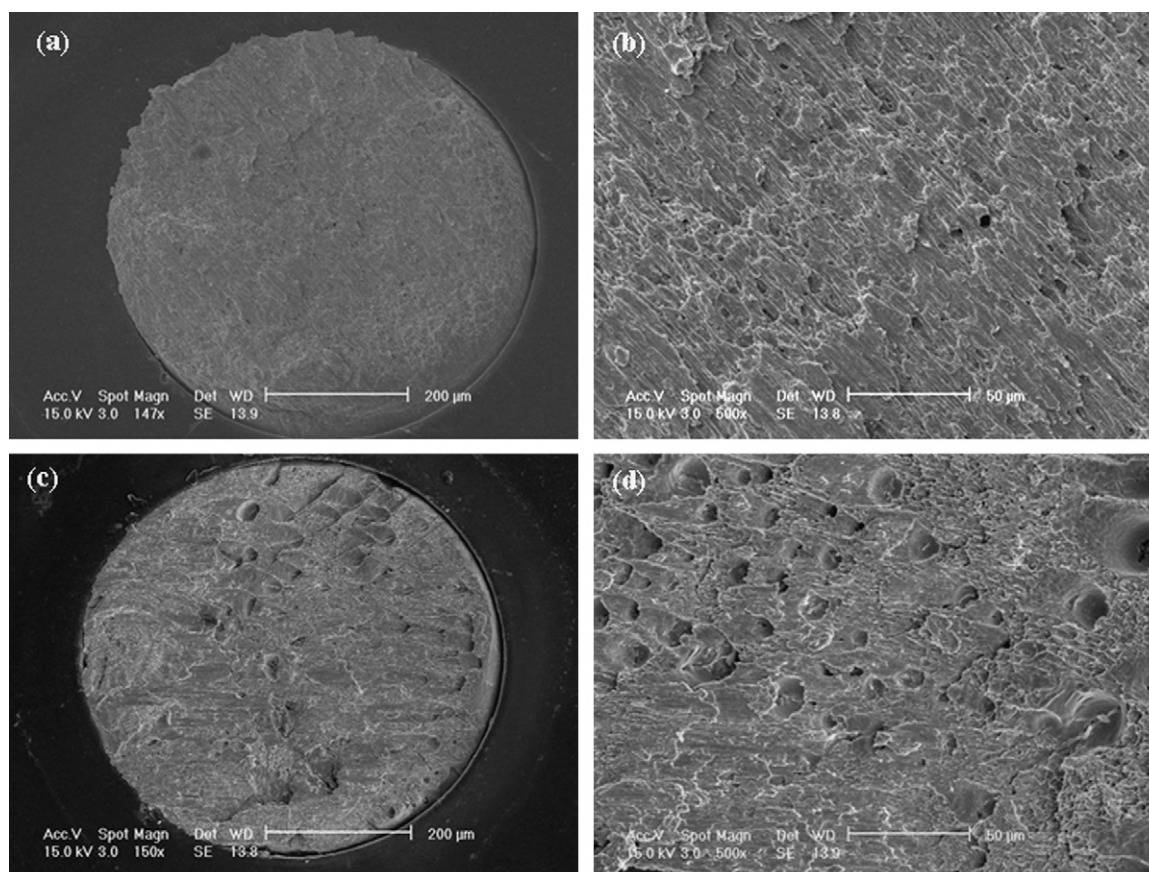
SEM micrographs of fracture surfaces of (a and b) plain Sn-Ag-Cu solder and (c and d) Sn-Ag-Cu-0.5SrTiO₃ composite solder joints after one reflow cycle.
